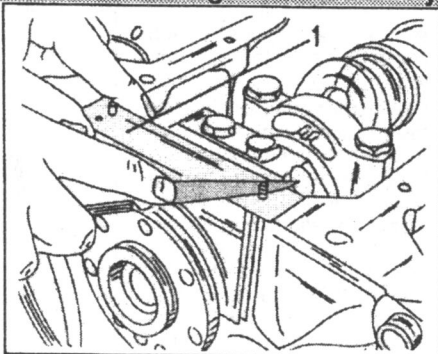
The protruding ends of both seals must be cut-off with a sharp knife. The sheet metal piece (1) is placed in position as shown.
